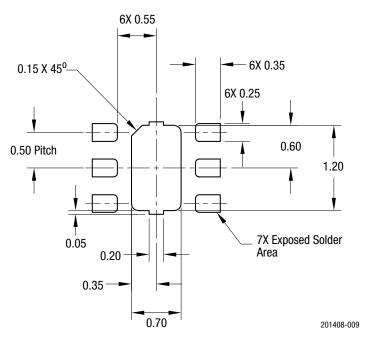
SKY13370-374LF PCB Layout Footprint (Top View)
